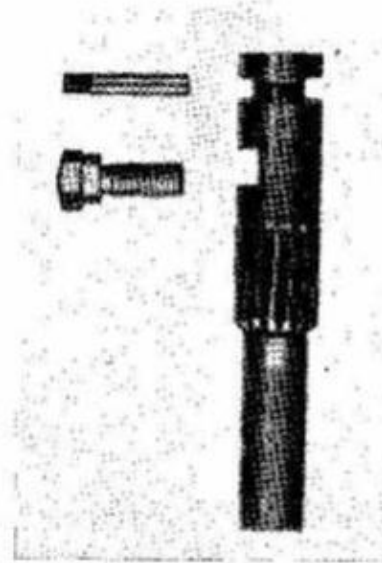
THE OIL PUMP PLUNGER, GUIDE SCREW, AND PIN
